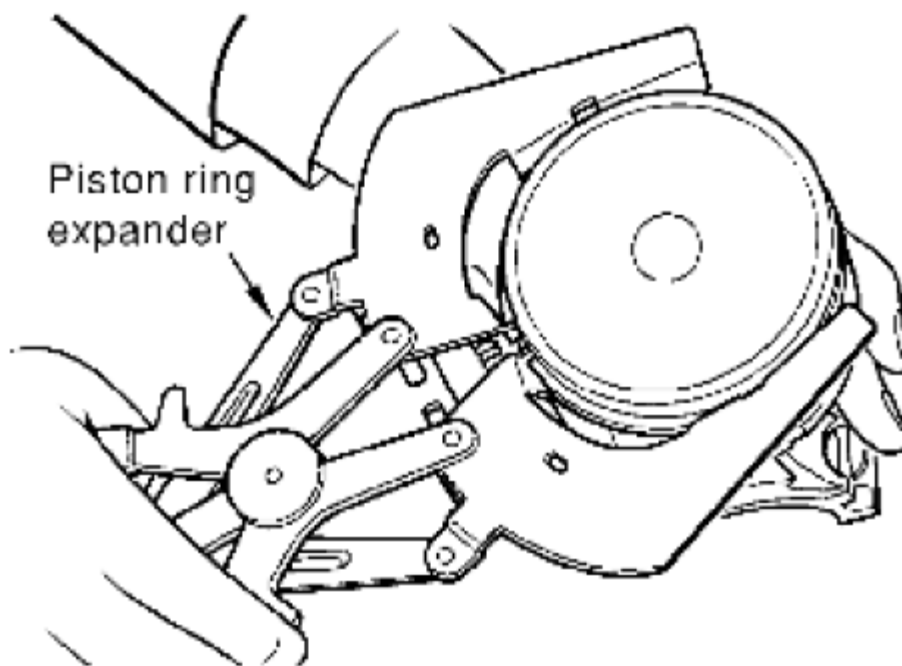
Removing Piston Rings Using Piston Ring Expander Or Suitable Tool
